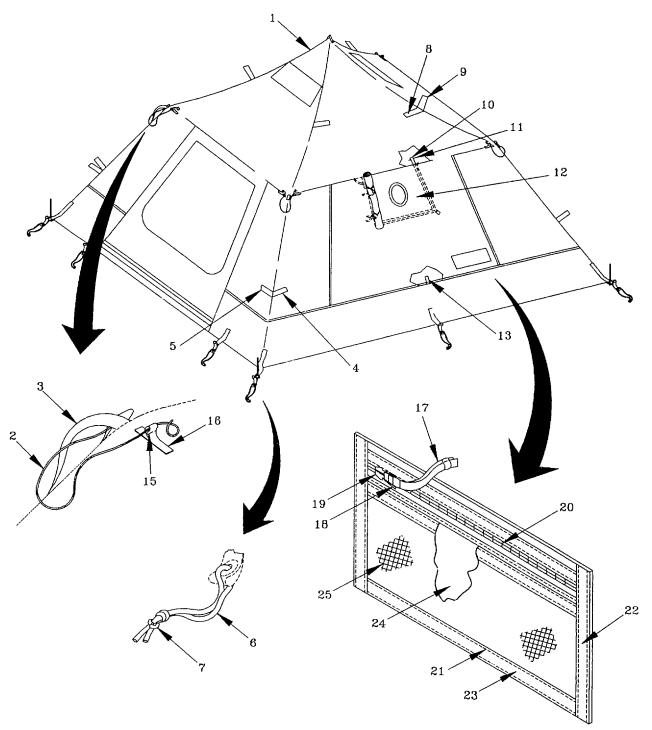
Tent Body Assembly (Sheet 1 of 7)
